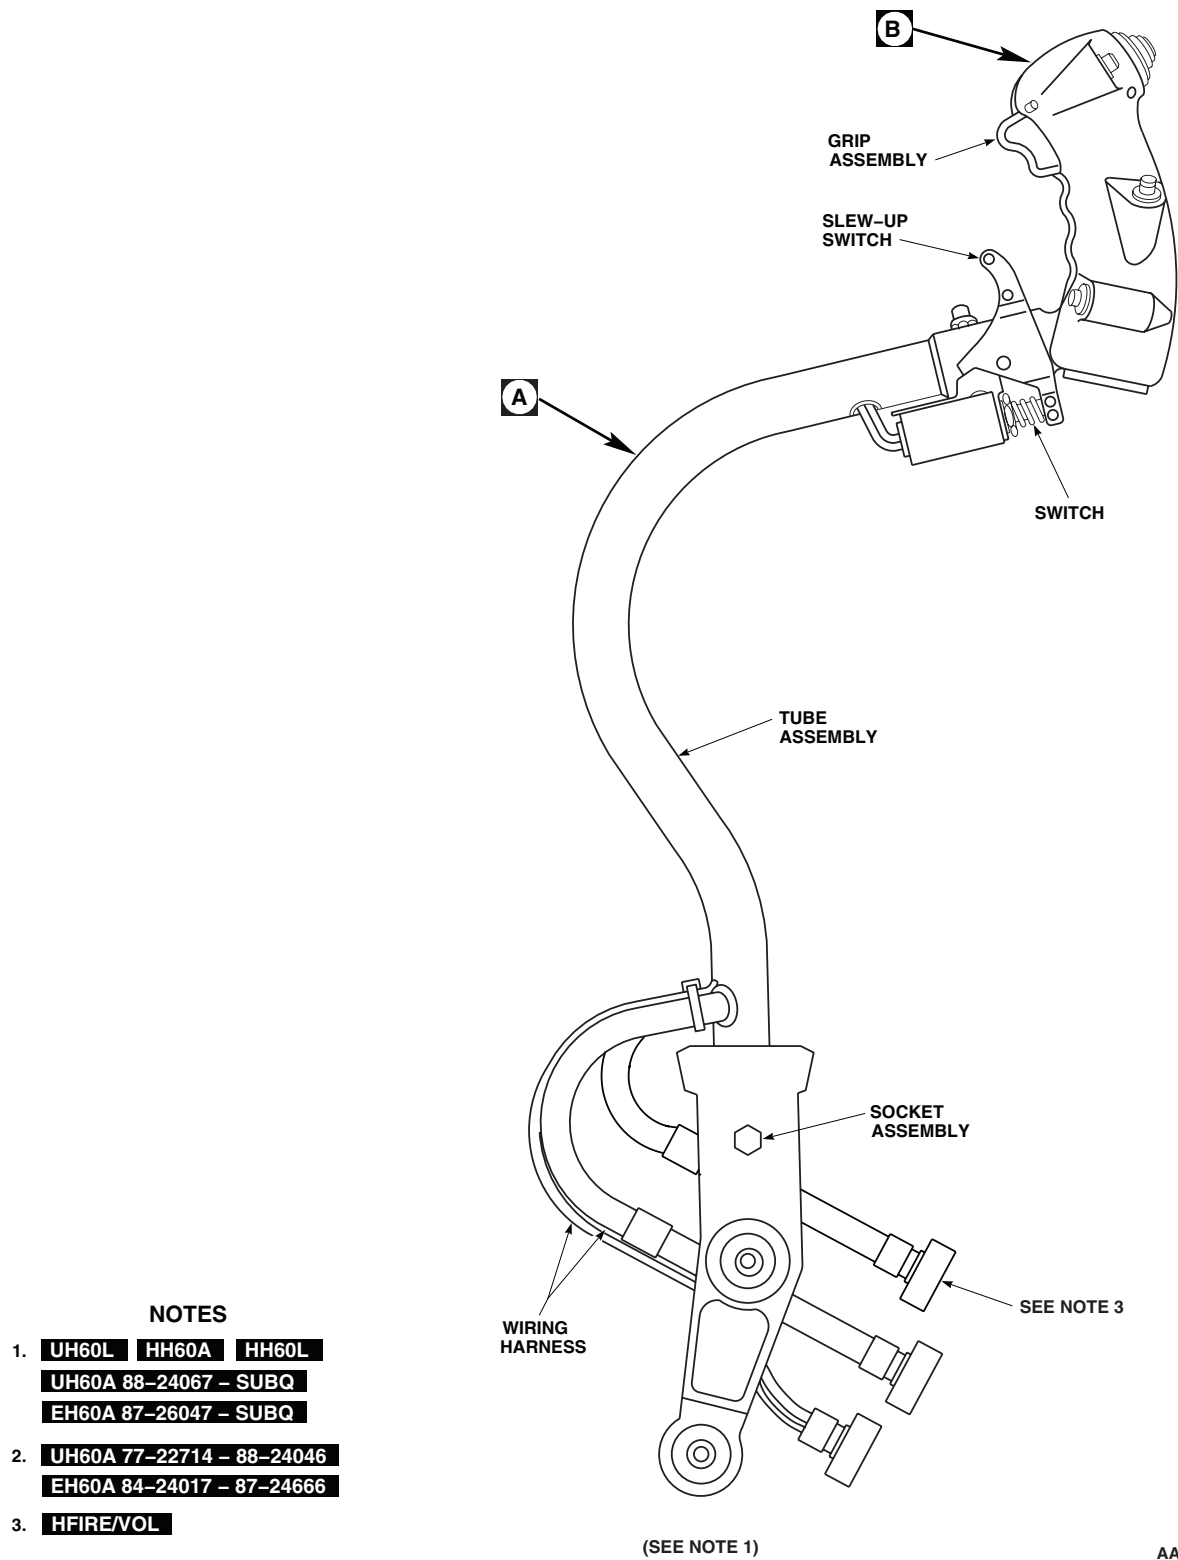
Cyclic Stick Assembly. (Sheet 1 of 2)
